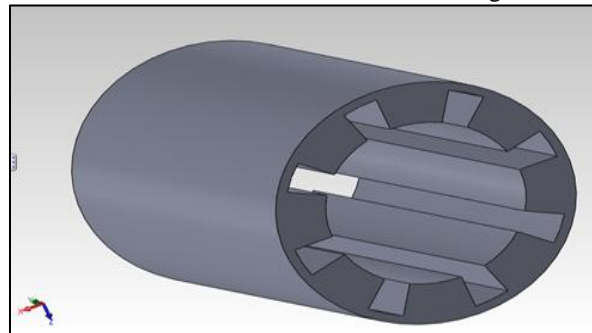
3D model of cold side heat exchanger (Extrude 2.54cm)
